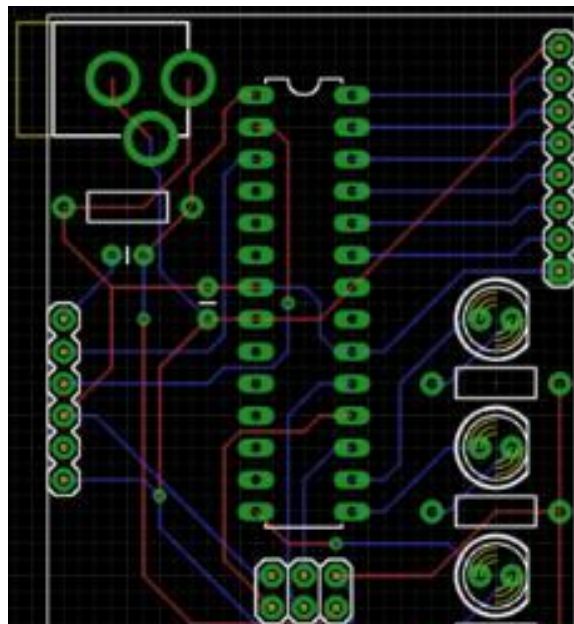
Example PCB design with Autodesk Eagle- PCB design software
